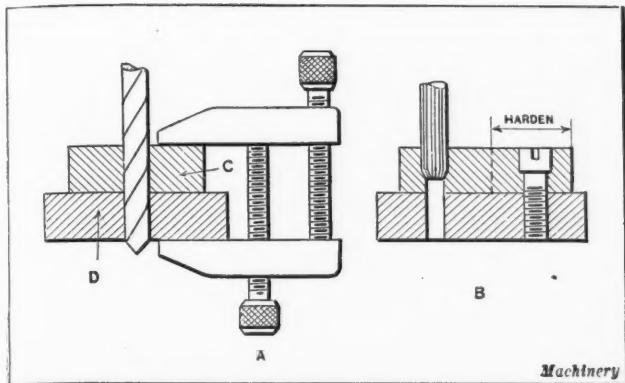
Method of drilling and reaming a Hole for a Dowel
